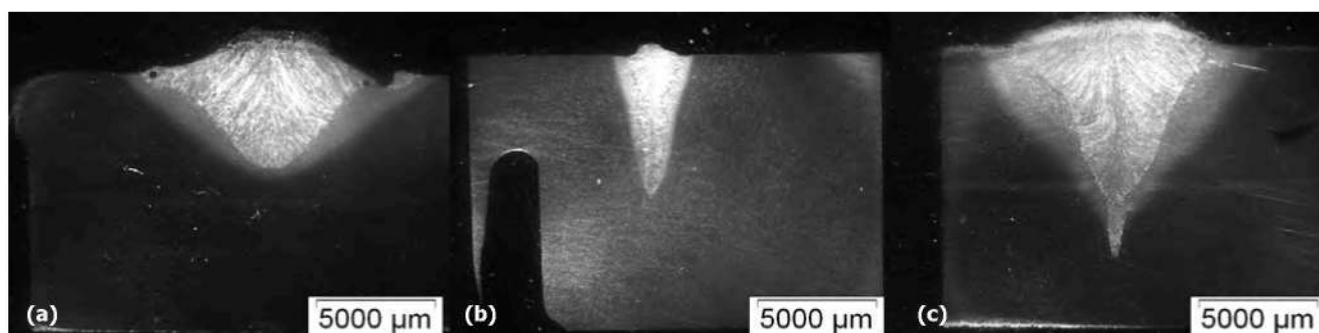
Weld cross-section of (a) – MIG, (b) – Laser and (c) – Laser-MIG hybrid welded mild steel specimens
